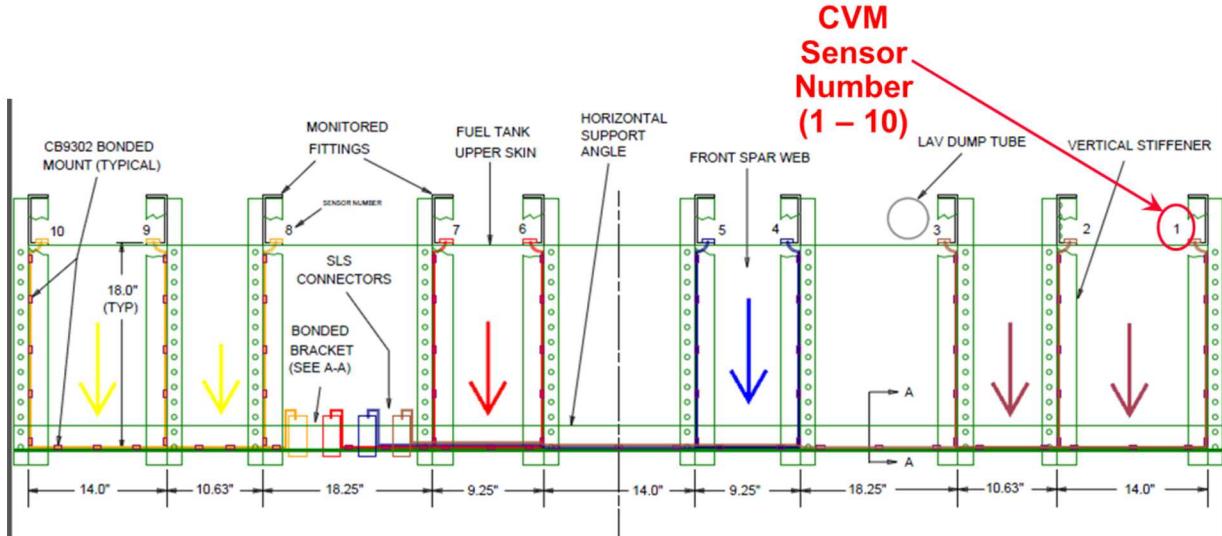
Sensor Layout on the Ten Wing Box Fittings and Routing Plan to the Four SLS Connectors
